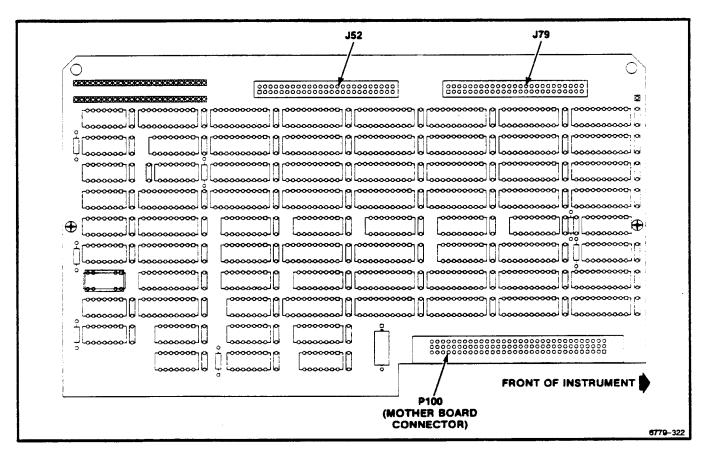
Connector locations for removal of the A16 Waveform Compressor board.
